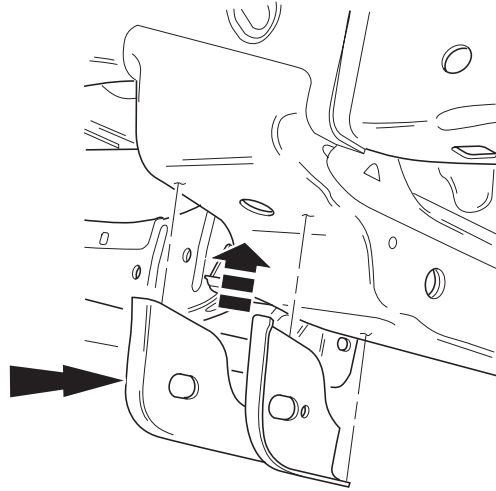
LOWER CONTROL ARM BRACKET PLACEMENT
